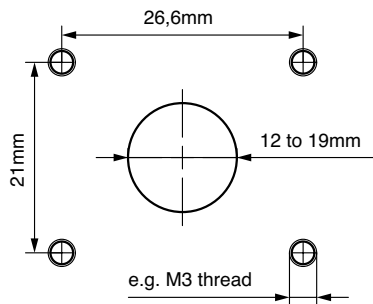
Position of mounting screws and lid cut-out for on-top mounting.
